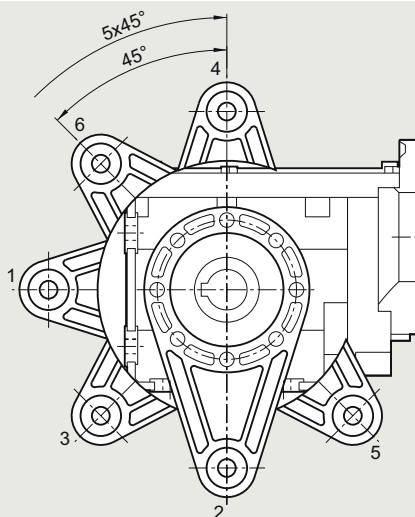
/7 Bevel gearboxes BAD, sizes 19 and 29
